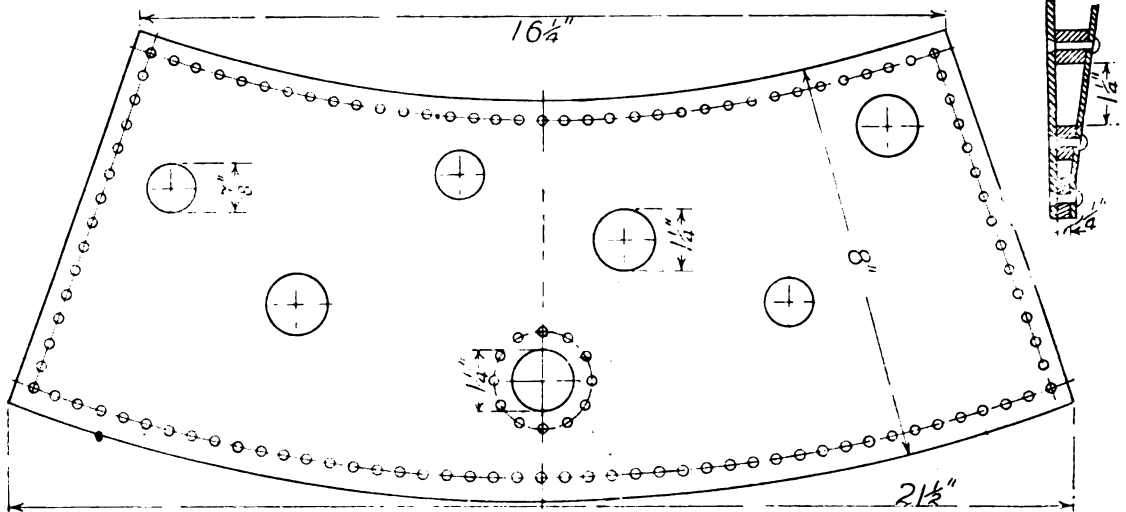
SHOWING DETAIL OF FIREBOX PLATE FOR MODEL BOILER.
